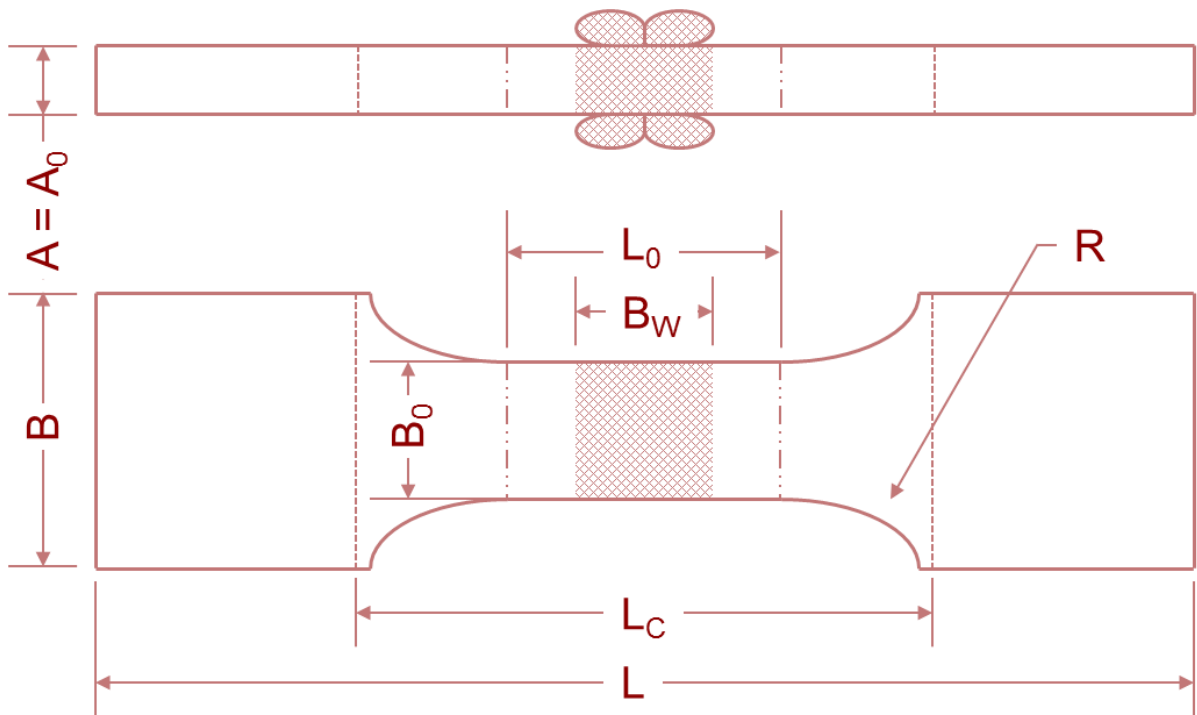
Geometry and dimensions of a tensile specimen Type 2 (Troughton, 2010) (BS, 2000a)
